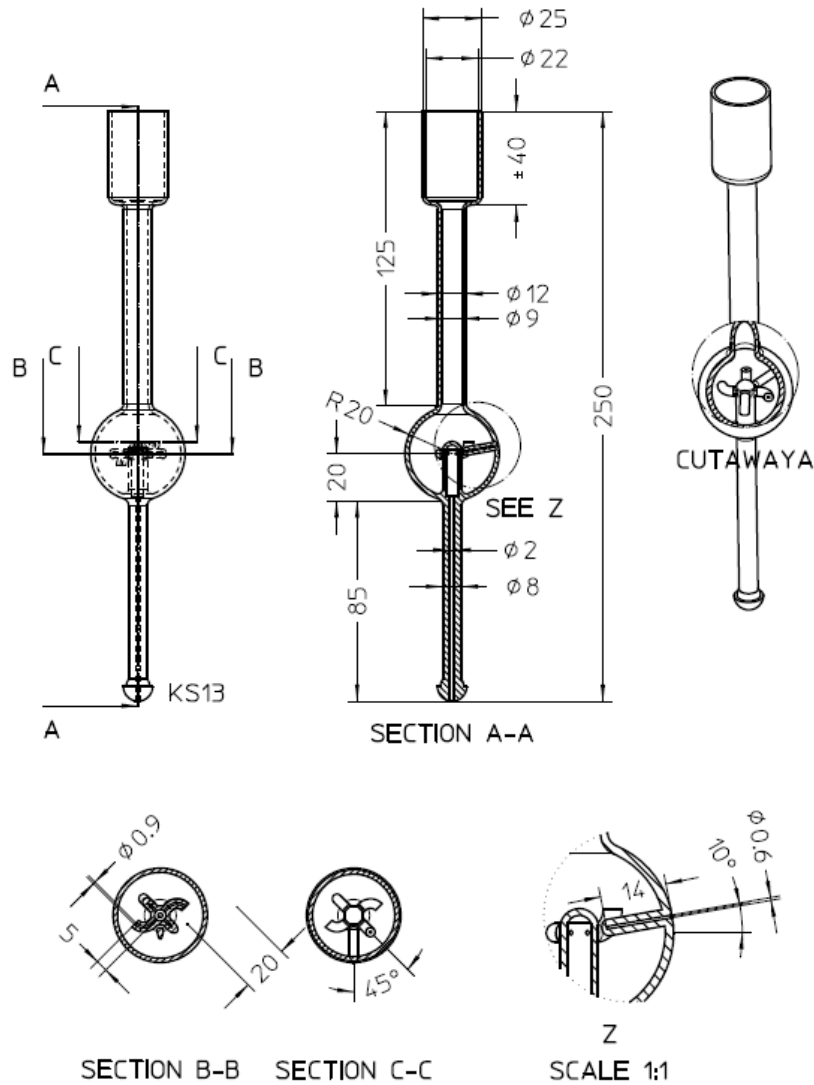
Schematic drawings used for the manufacturing of the JSR reactor
